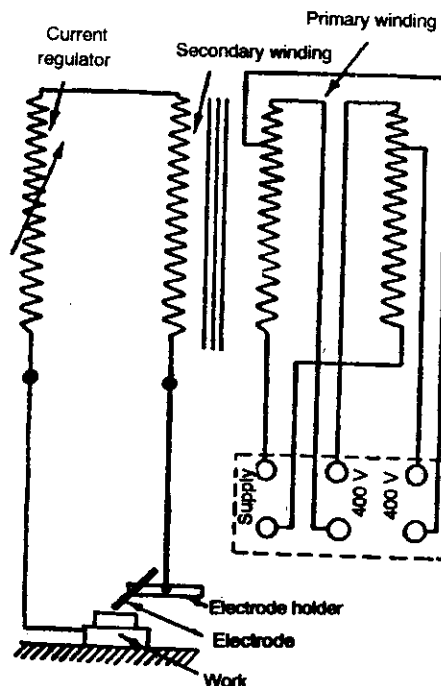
Connection diagram of an A.C. welding set (Indian make)
